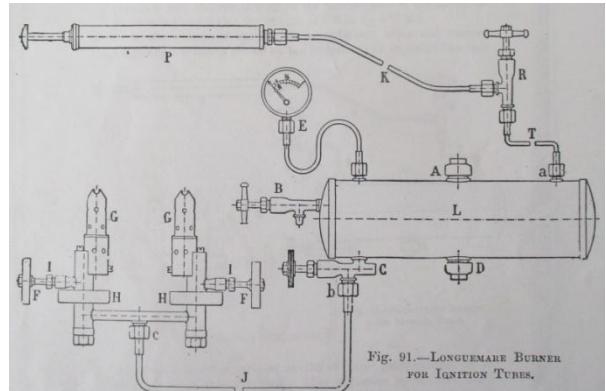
LONGUEMARÉ BURNER FOR IGNITION TUBES.
